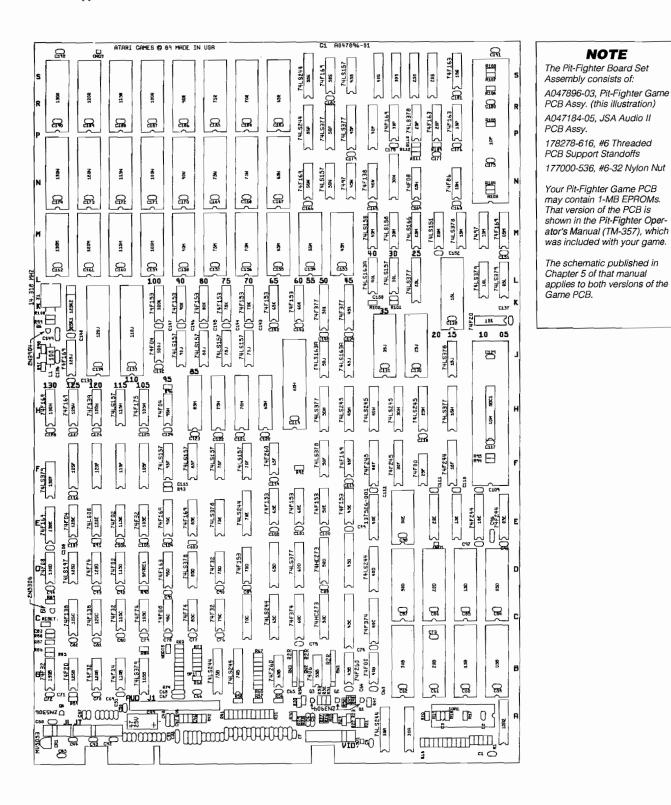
Pit-Fighter Game PCB Assembly (4-MB PROM Version) A047896-03 C
